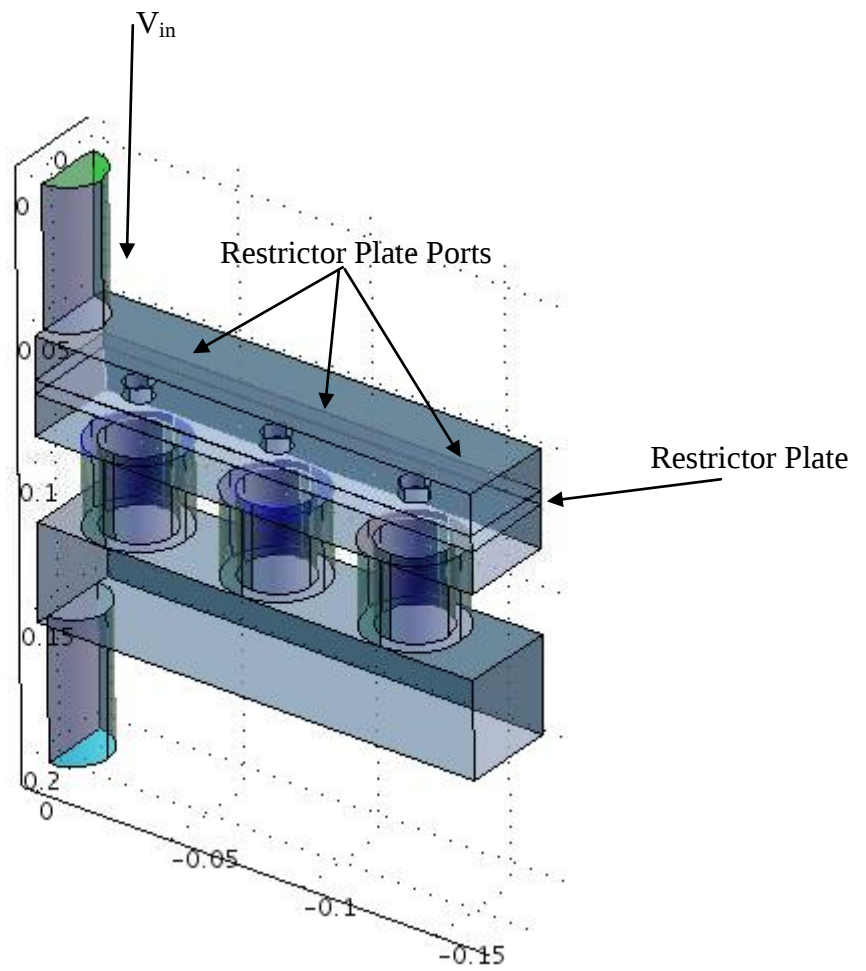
Design 3 – Axial aligned port manifold with diffuser plate
